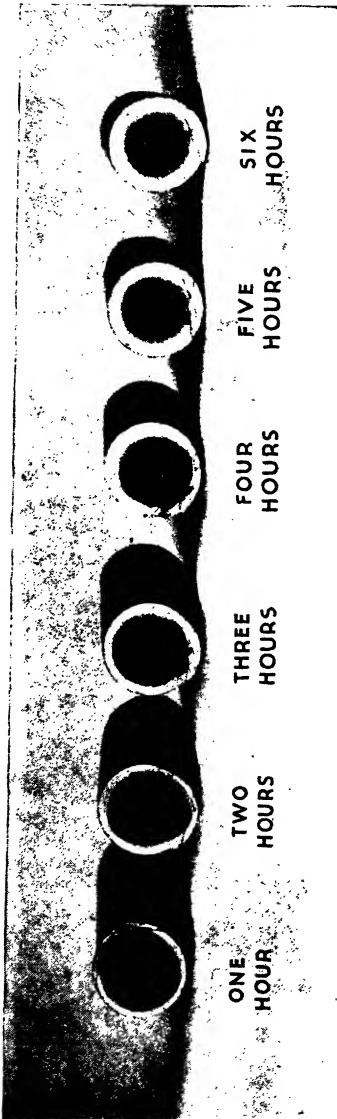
BAR SECTIONS AFTER CASE HARDENING
